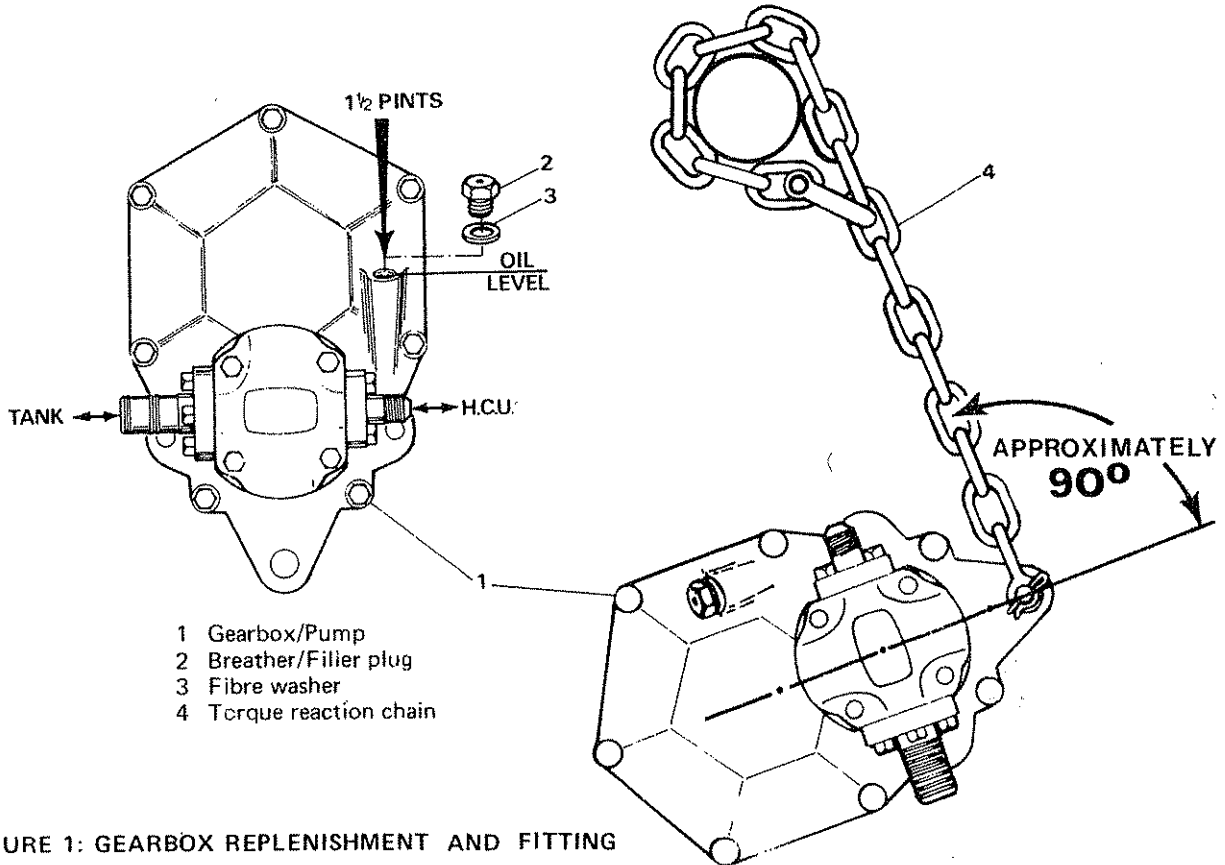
GEARBOX REPLENISHMENT AND FITTING
